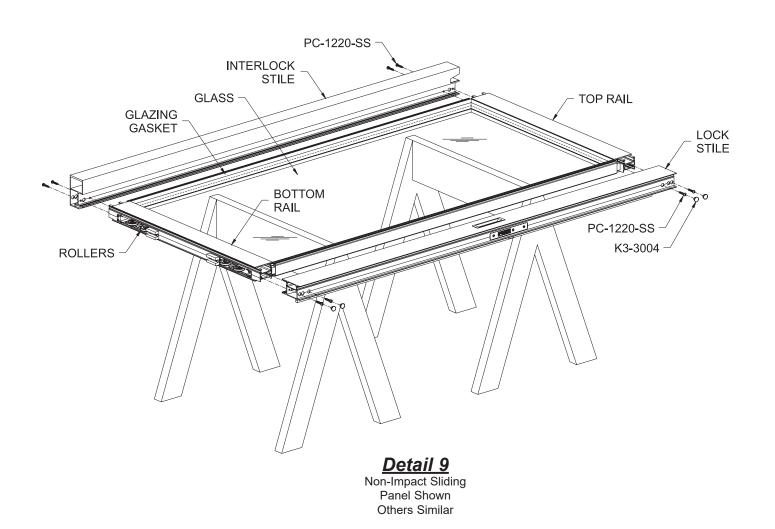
Non-Impact Sliding Panel Shown Others Similar
